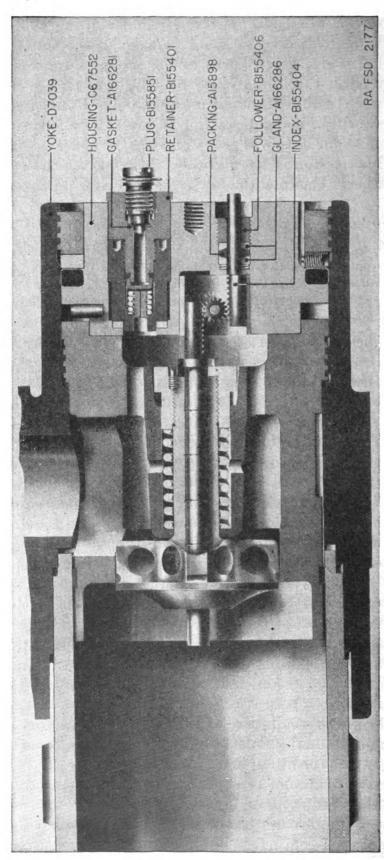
155-mm gun recuperator cylinder head—rear view.
